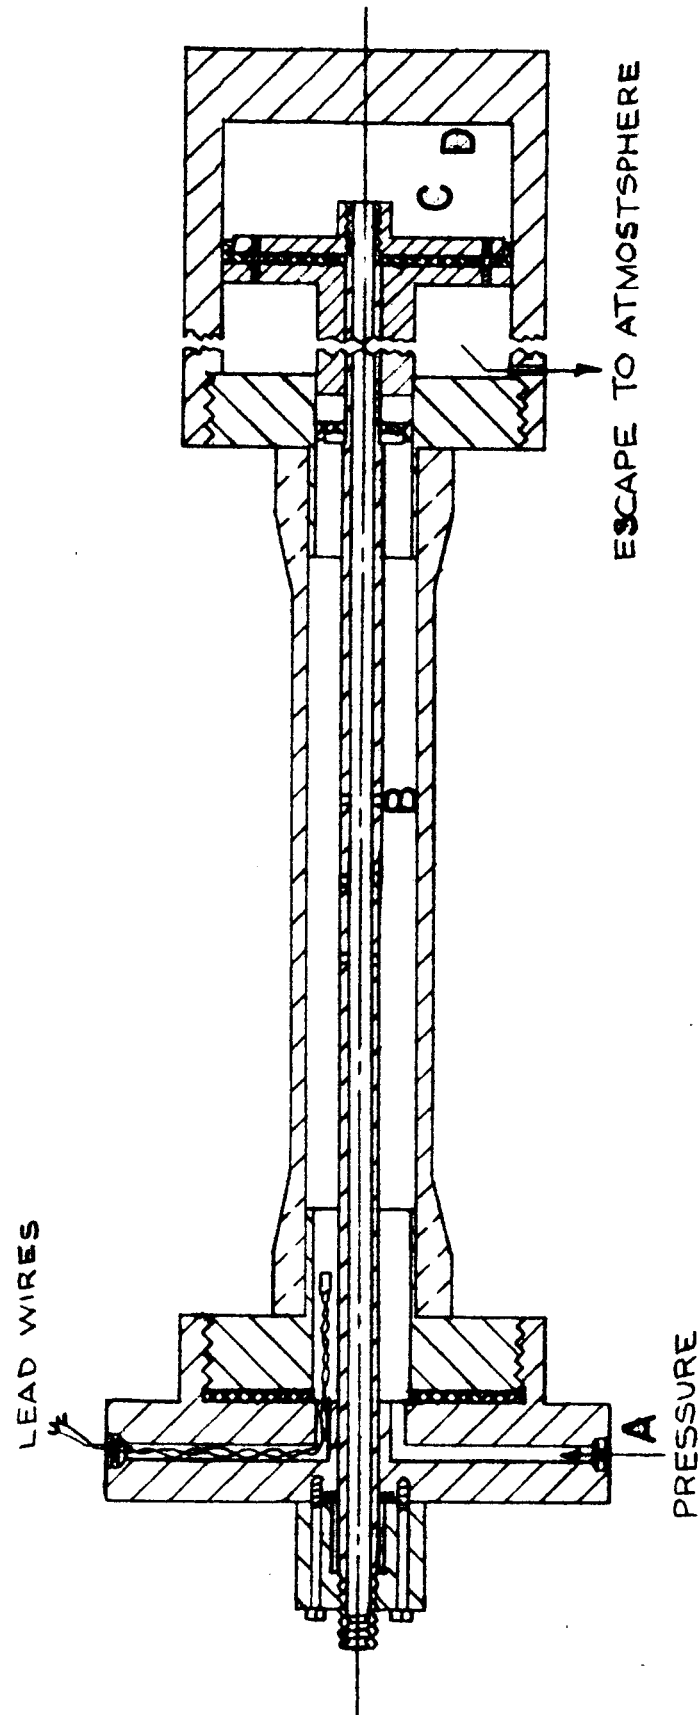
SPECIMEN HEAD ASSEMBLY OF THE BIAXIAL APPARATUS
